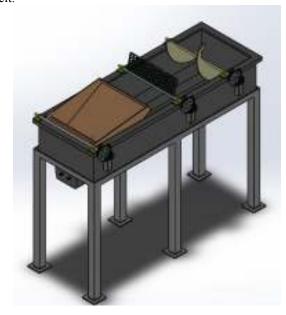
The design of frying skillet machine which the main parts of this machine are heater, oil tank, propeller, rotating wire mesh and coated peanut cage.
